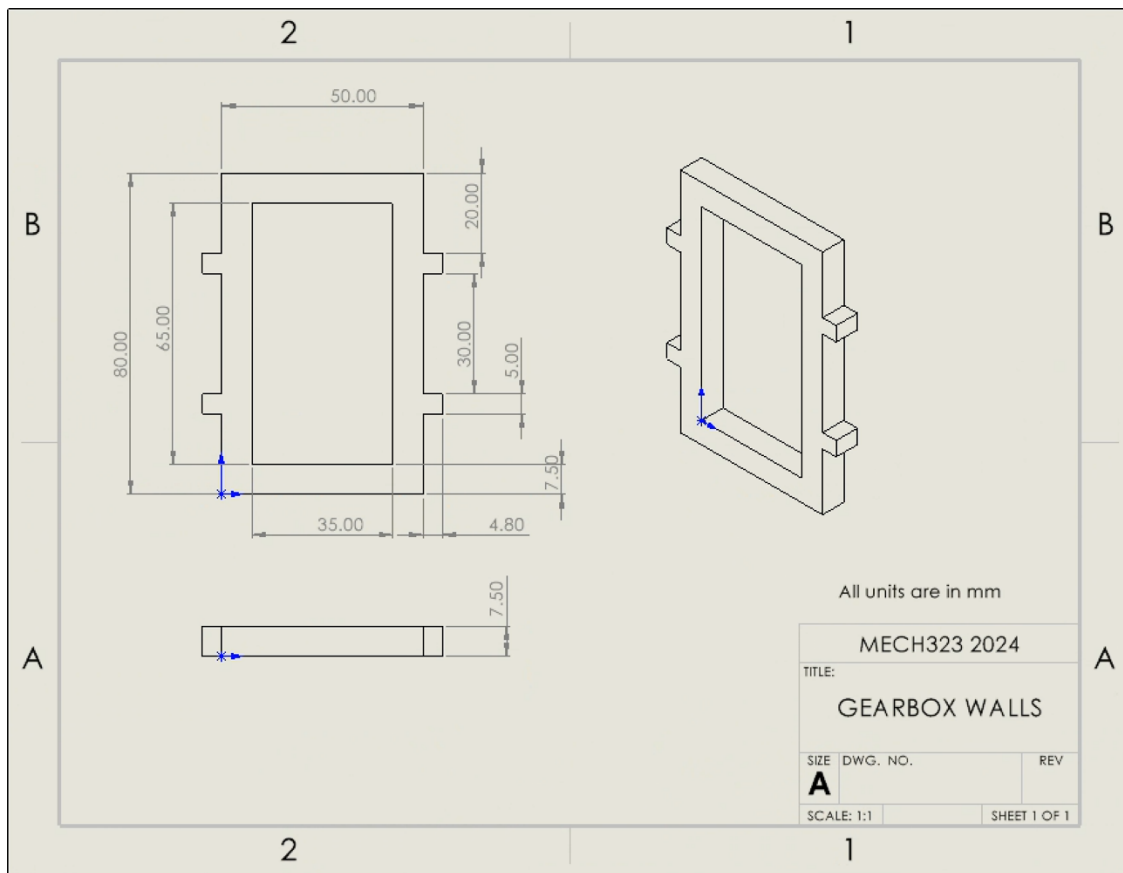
Fully dimensioned drawing of the housings left and right sides. The drawing includes front, top and isometric views of the part.
